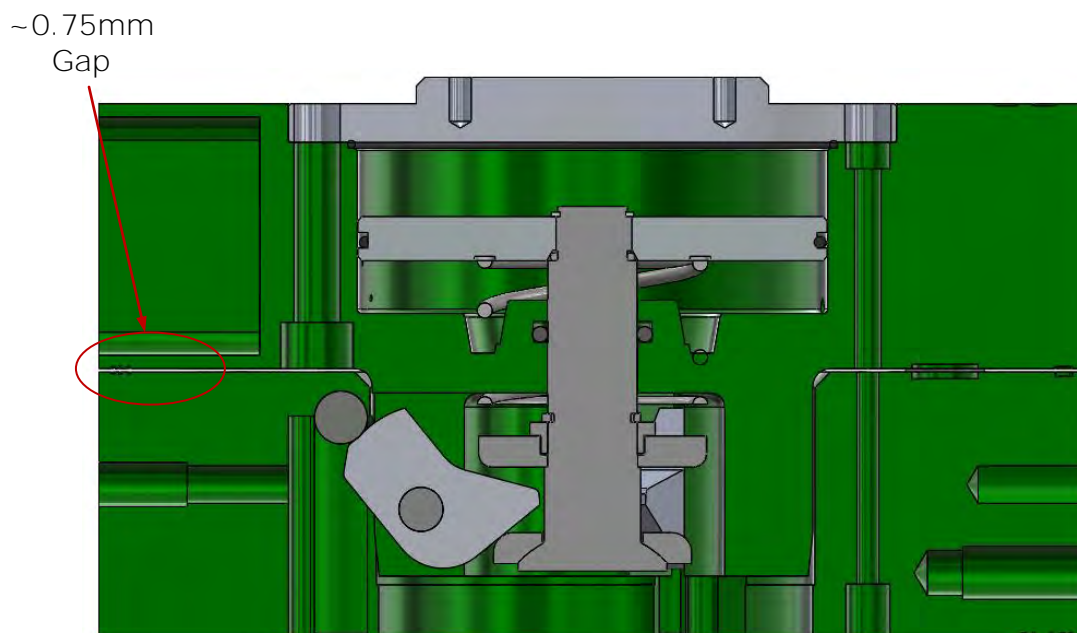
E125 Robot & Tool Adaptor – Loss of Air Mechanical Lock
